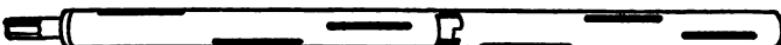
The Mead rotating cylinder valve for a six-cylinder engine.
